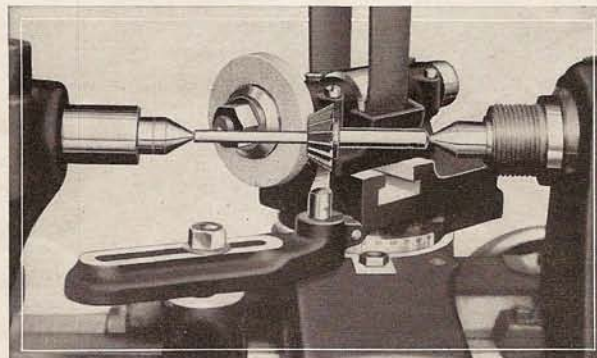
Sharpening an Angular Milling Cutter on a No. 22—9-inch Junior Lathe
